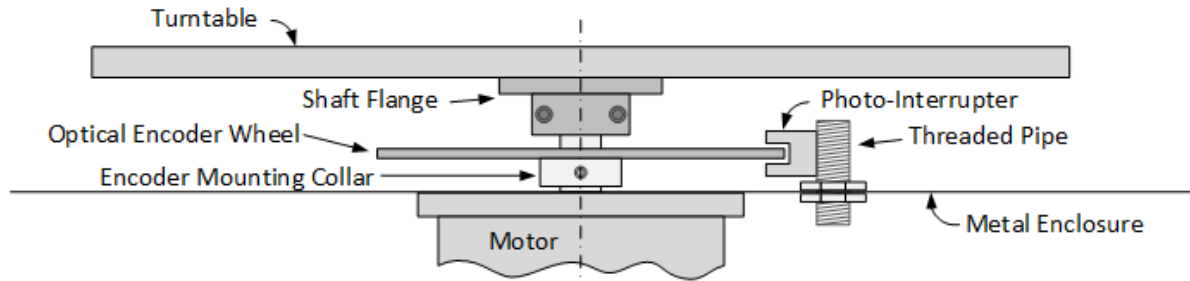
Assembly drawing detail showing shaft-mounted optical encoder.
